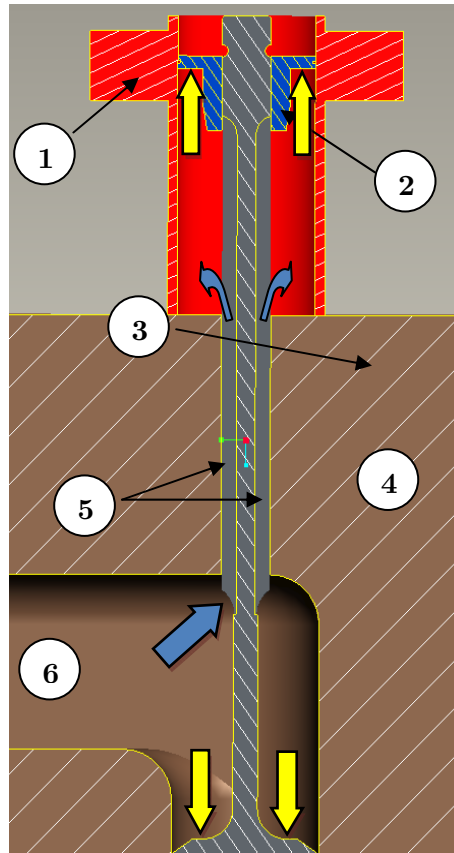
A simple cross-section illustration of the pneumatic valve spring arrangement mounted on the cylinder head
